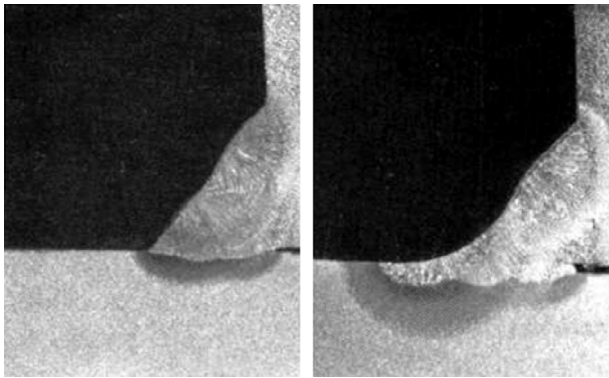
Typical weld toe profile in the as-welded condition and following TIG dressing [4].
